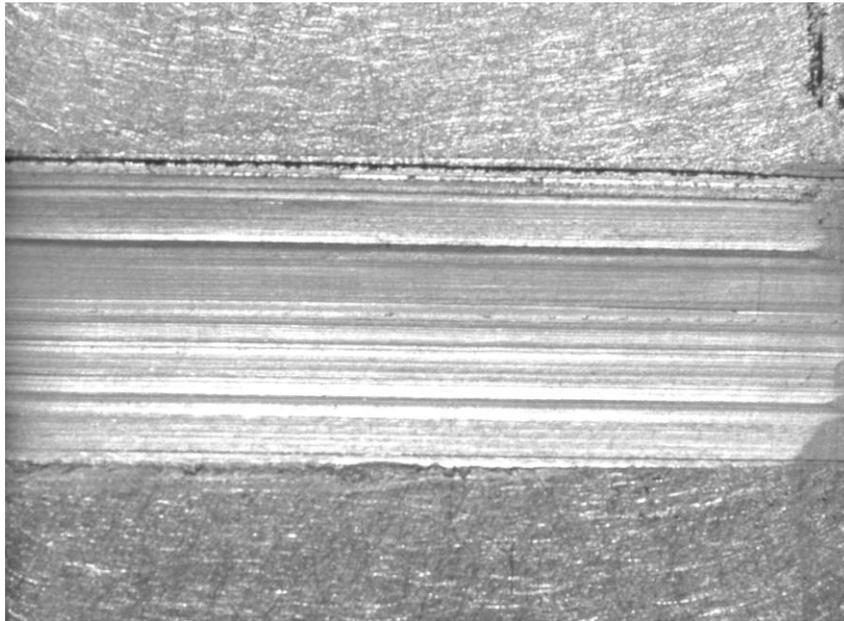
Typical Weld Produced by a Non-Rotating Shoulder
